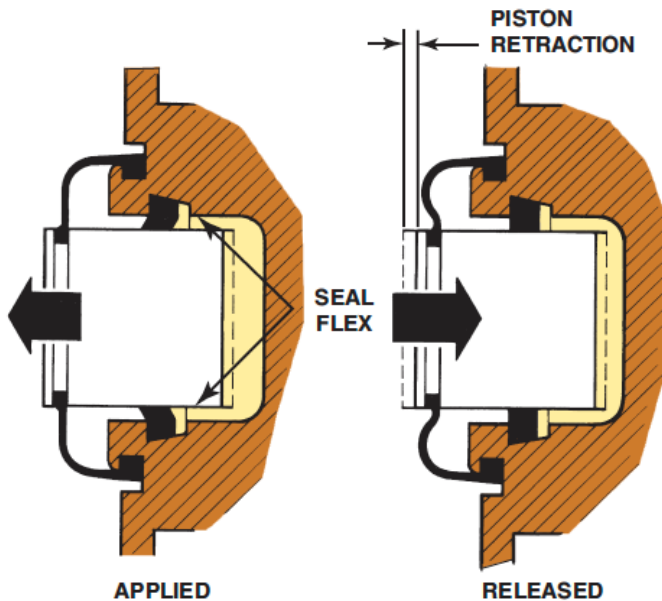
The square-cut O-ring not only seals hydraulic brake fluid but also retracts the caliper piston when the brake pedal is released.
